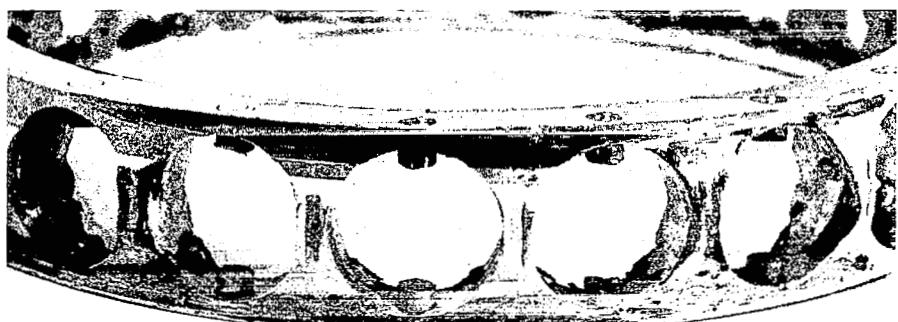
Appearance of Cage OD Surface, Pin and Ball Pocket Damage – Drilled-Ball Bearing S/N 2600A-2
